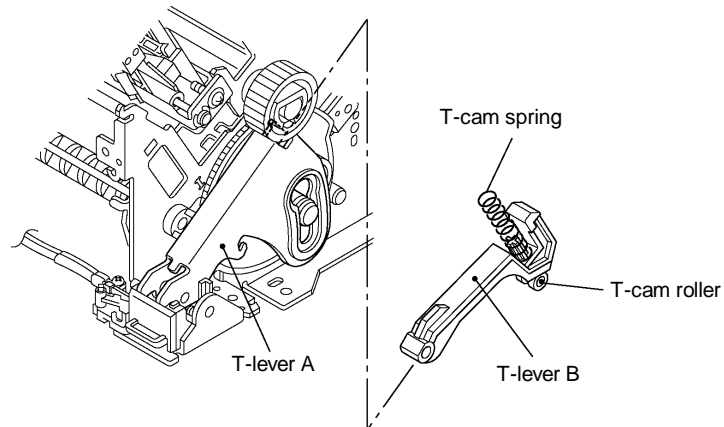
Installing the Right Side of the Chassis 3
